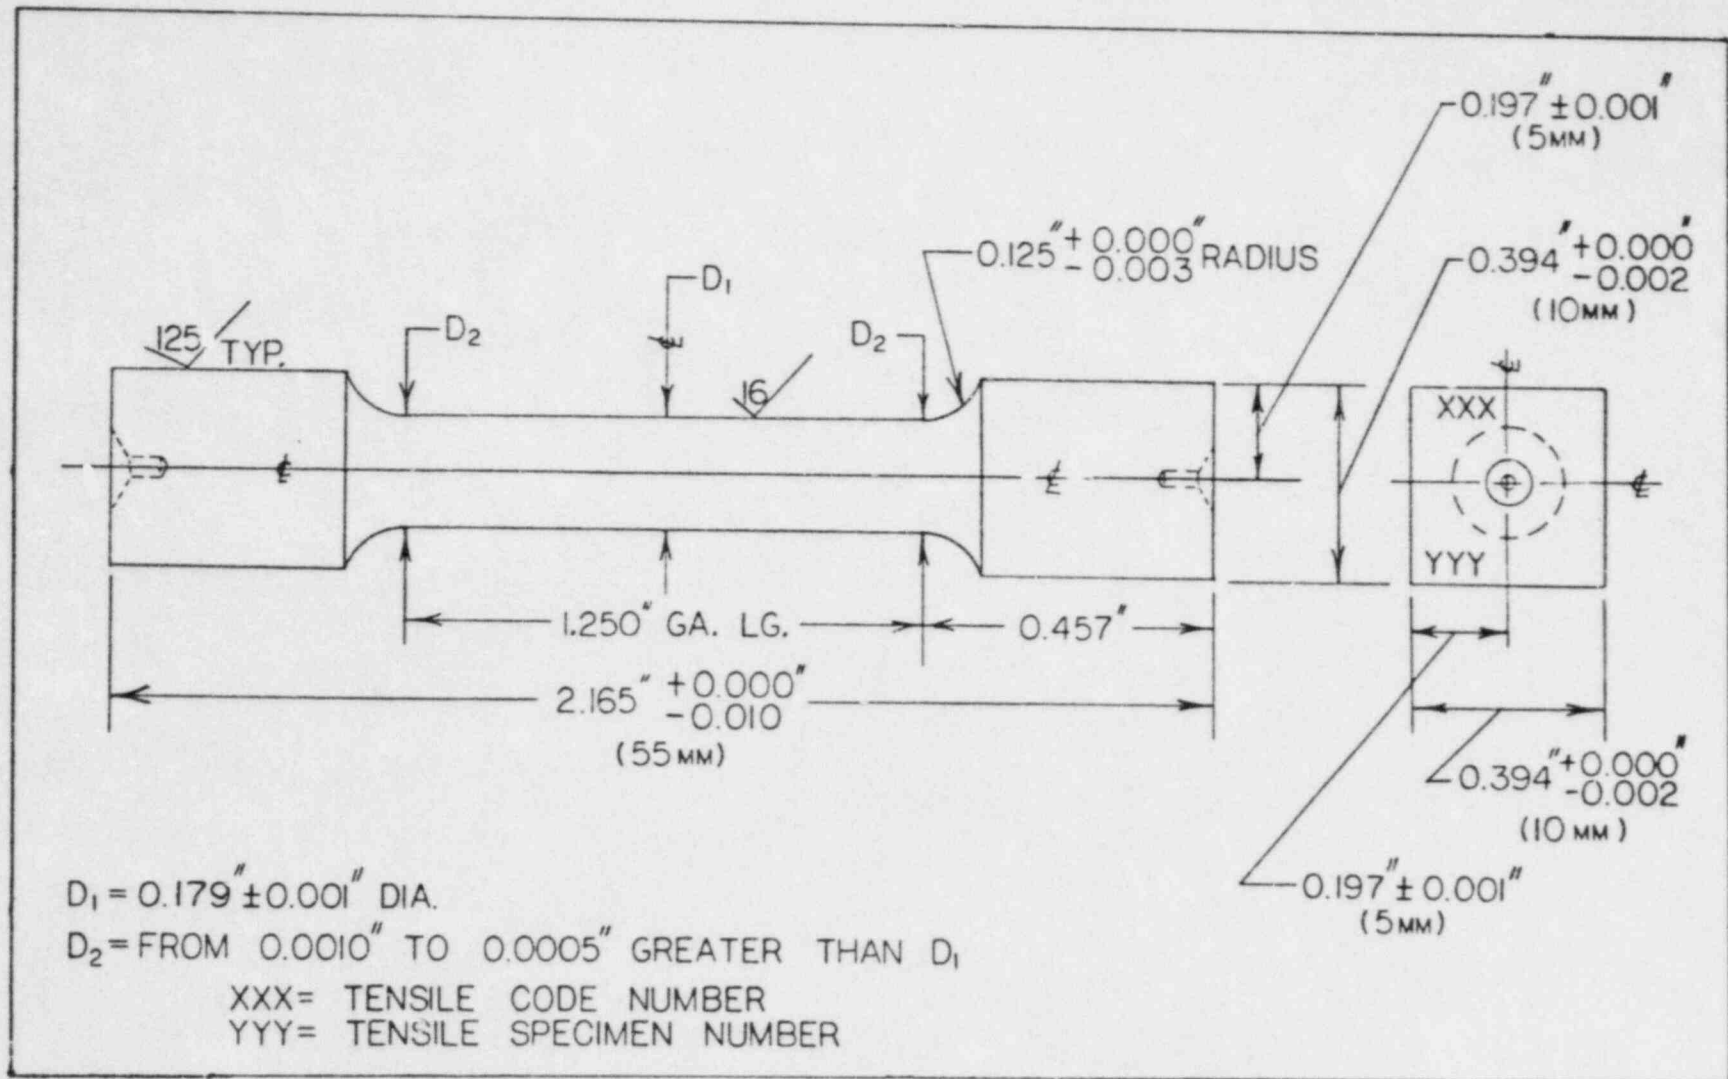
Tension test specimen design. (Dimensions in inches, 1 in. = 2.54 cm.)
